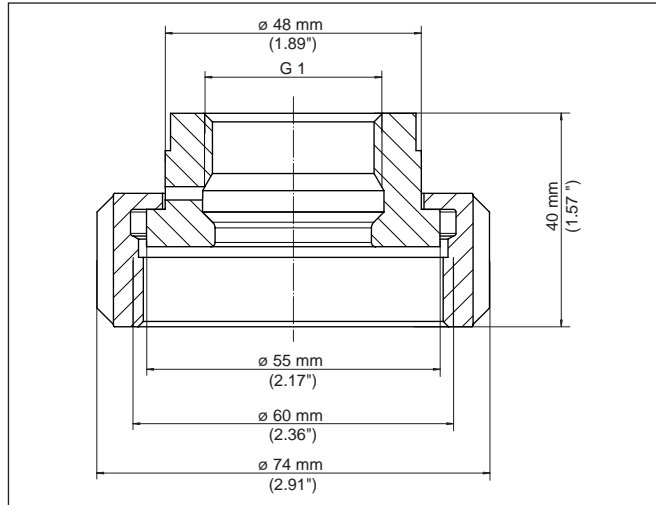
Dimensions hygienic adapter G1 (DIN 3852-X) on SMS DN 25 - O-ring seal
